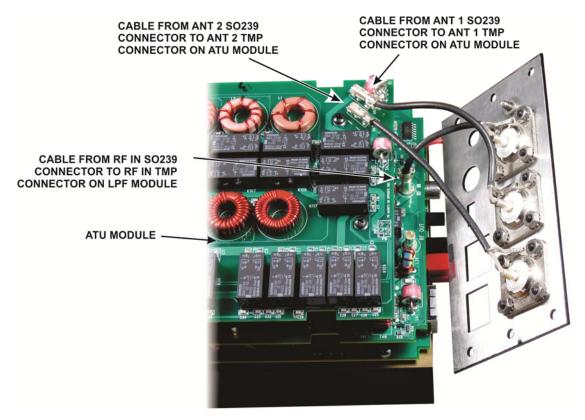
Connecting Rear Panel Cables to the LPF and ATU PC Boards.
